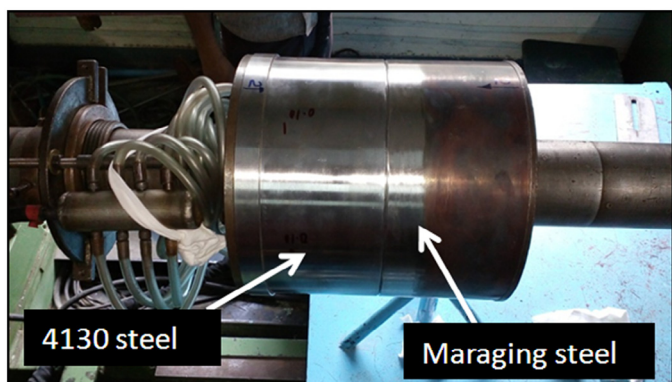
Weld fixturing setup for both TIG and laser beam welding processes.
